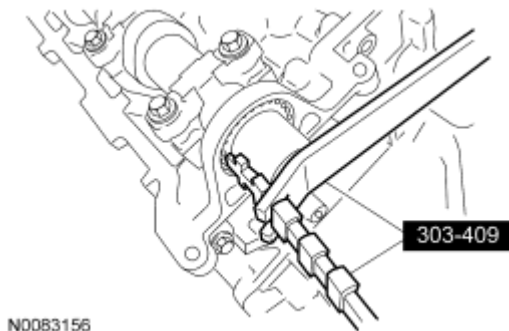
Removing Camshaft Oil Seal Using Special Tool (303-409)
